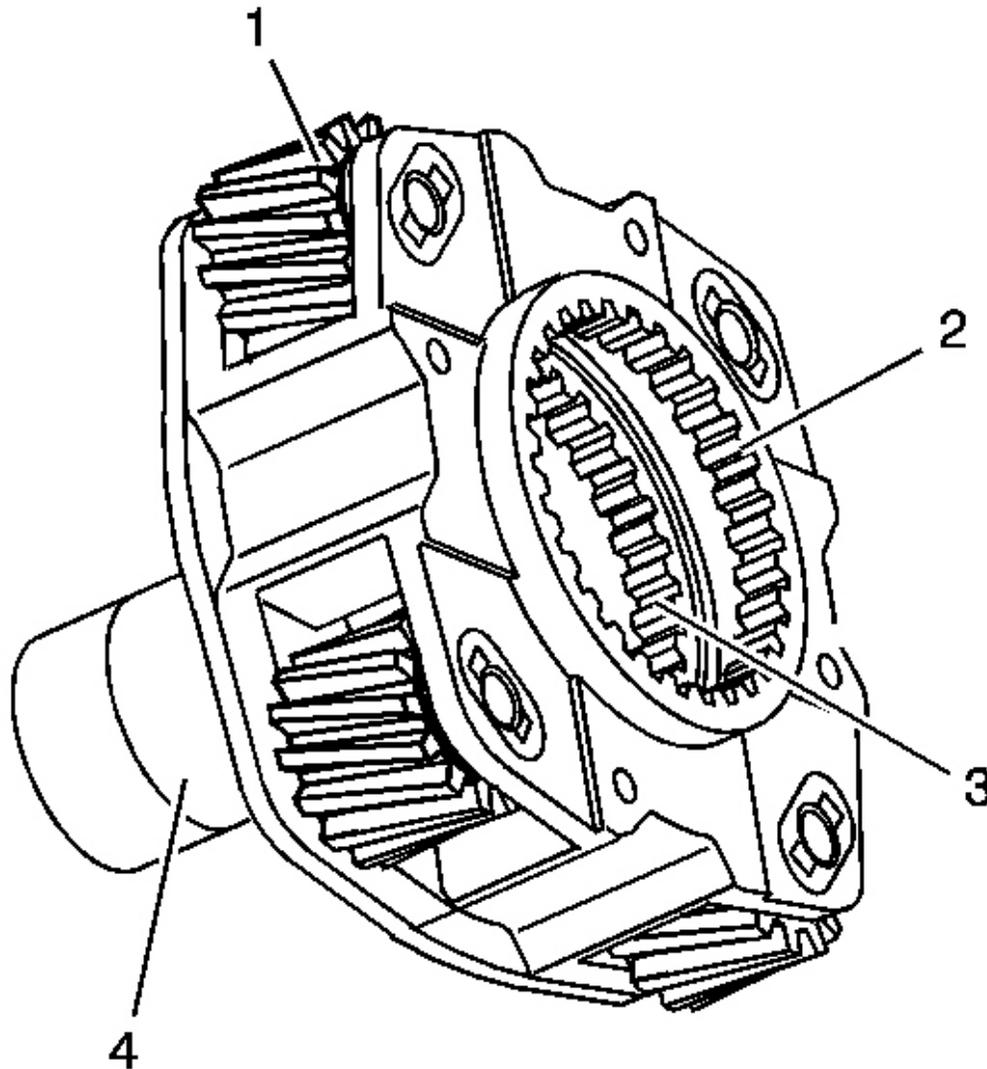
View Of High/Low Planetary Carrier Inspection Areas
